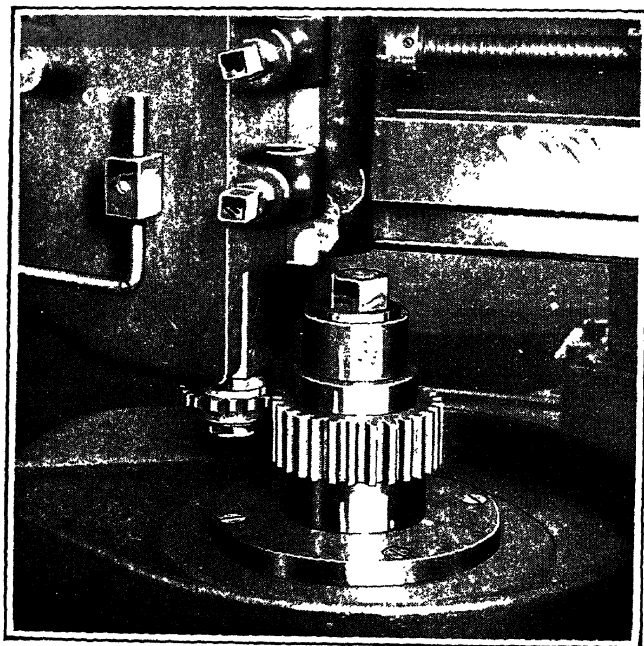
Cutter and gear blank. (Fellows Gear Shaper.)
